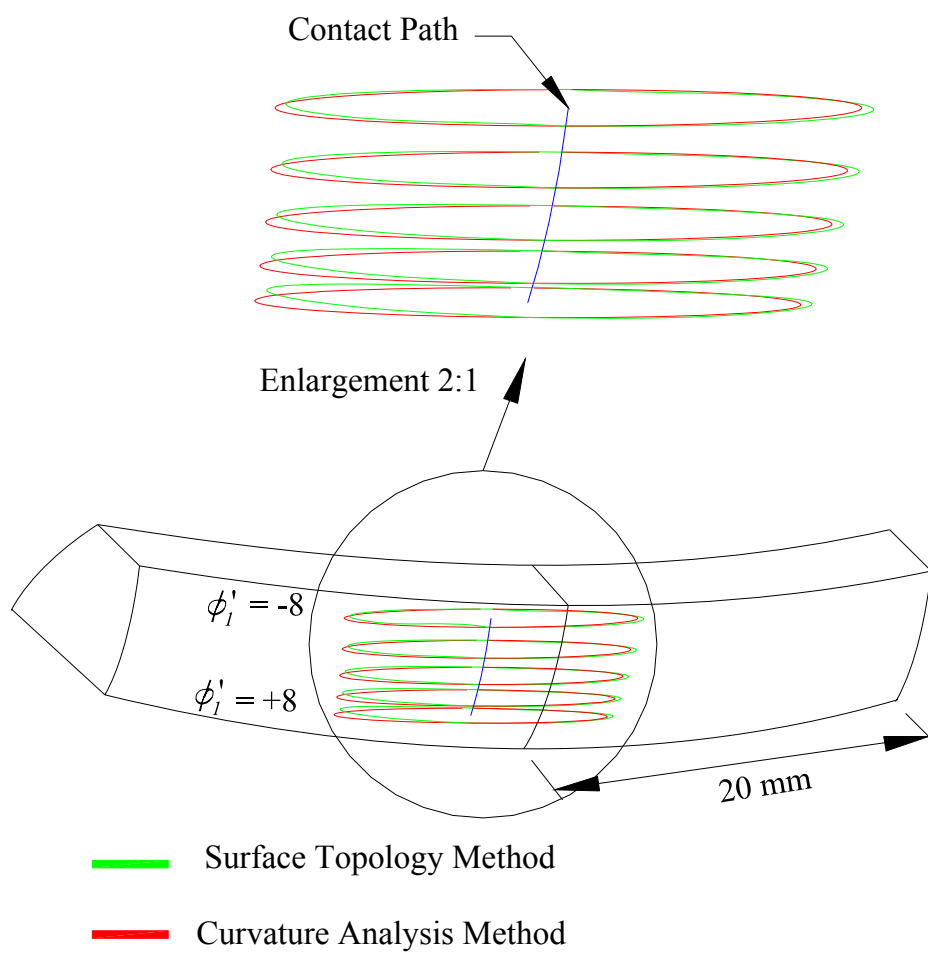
Contact ellipses and bearing contacts on the pinion surface under an assembly error $\Delta Z = 0.1$ mm
